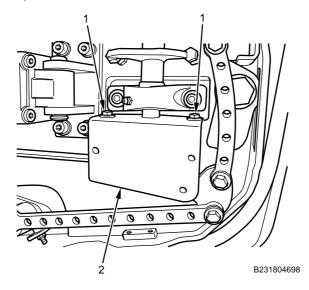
Hex Bolts Installed on Inner Shaft Lockplate Bracket.
